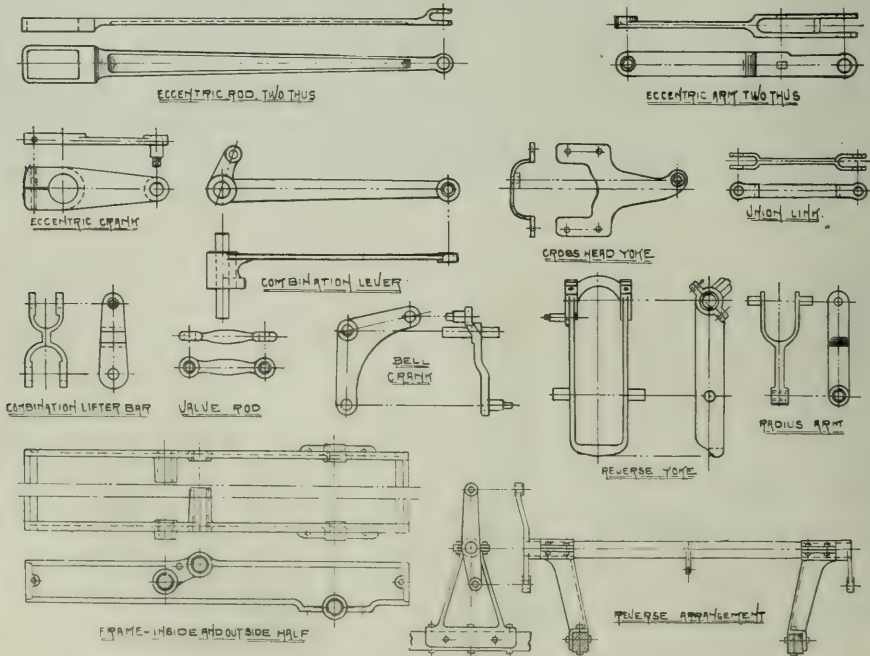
Details of the Baker-Pilliod Valve Gear.
